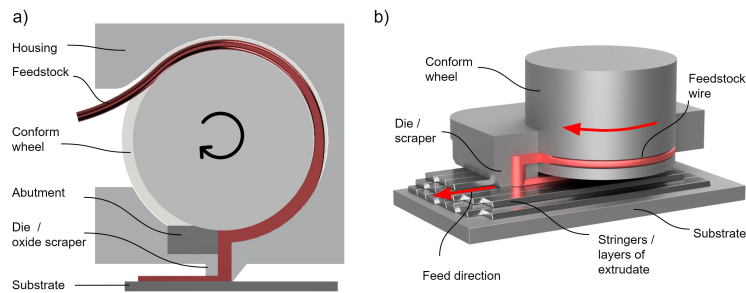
Principal illustrations of the HYB-AM extruder; (a) The extruder consists of a wheel with a groove surrounded by a stationary housing. The feedstock wire is pressed into the groove, and upon rotation the extrusion pressure is built up as the material is blocked by an abutment close to the die. The die also act as a scraper in order to remove oxides from the substrate prior to bonding with the extrudate; (b) Rendering of the extruder and a deposited structure.
